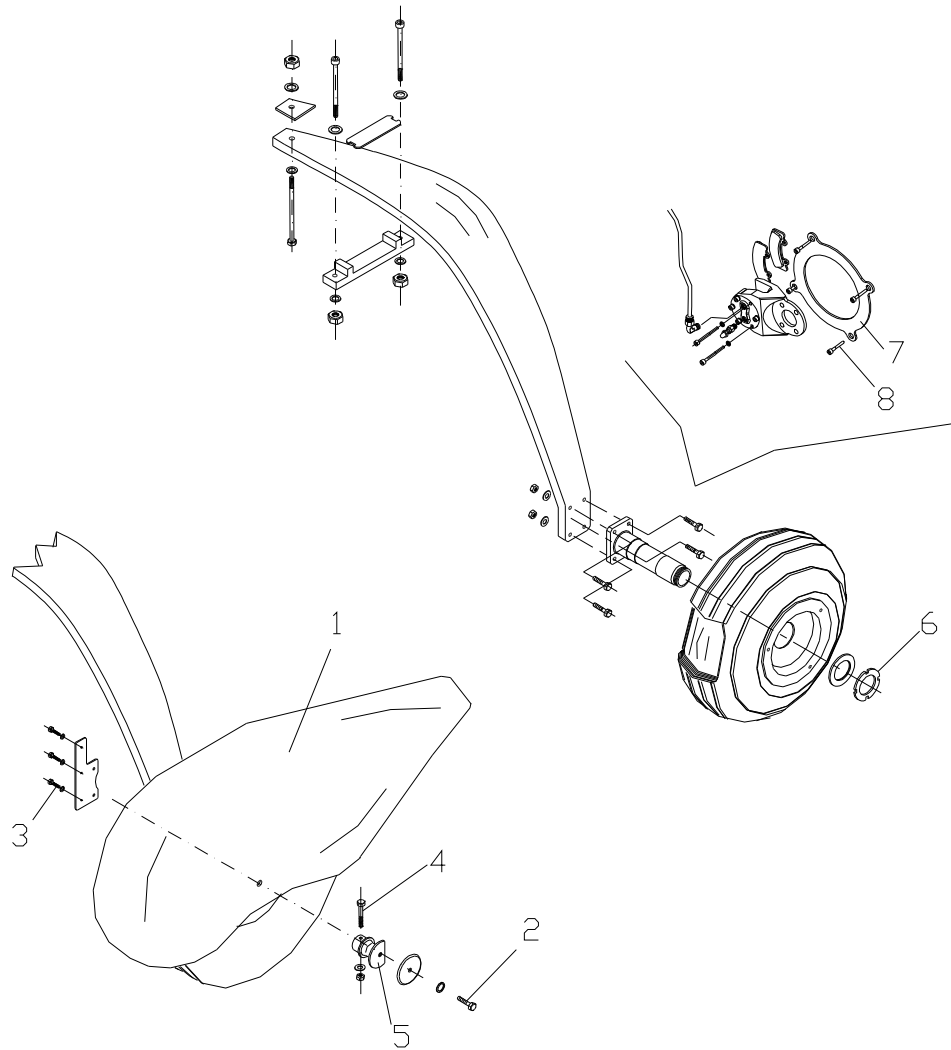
REMOVAL OF THE MLG WHEEL.
